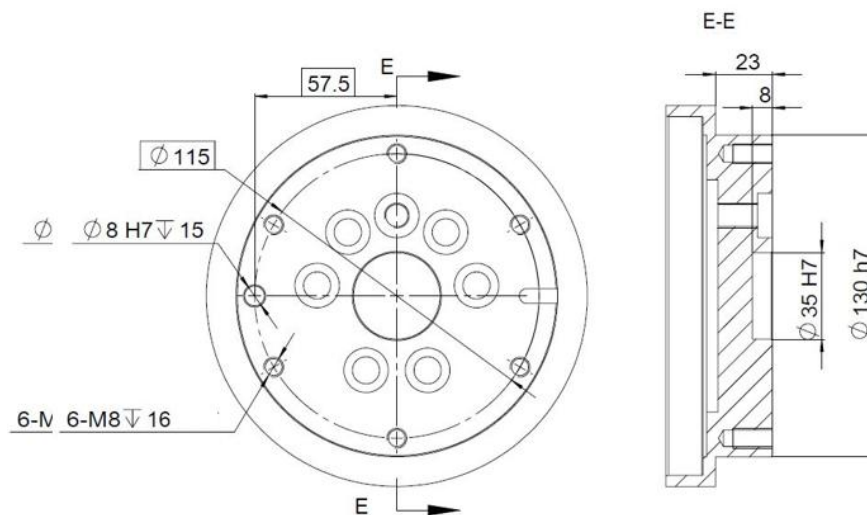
Schematic Diagram of Flange Dimensions for the Wrist of the
